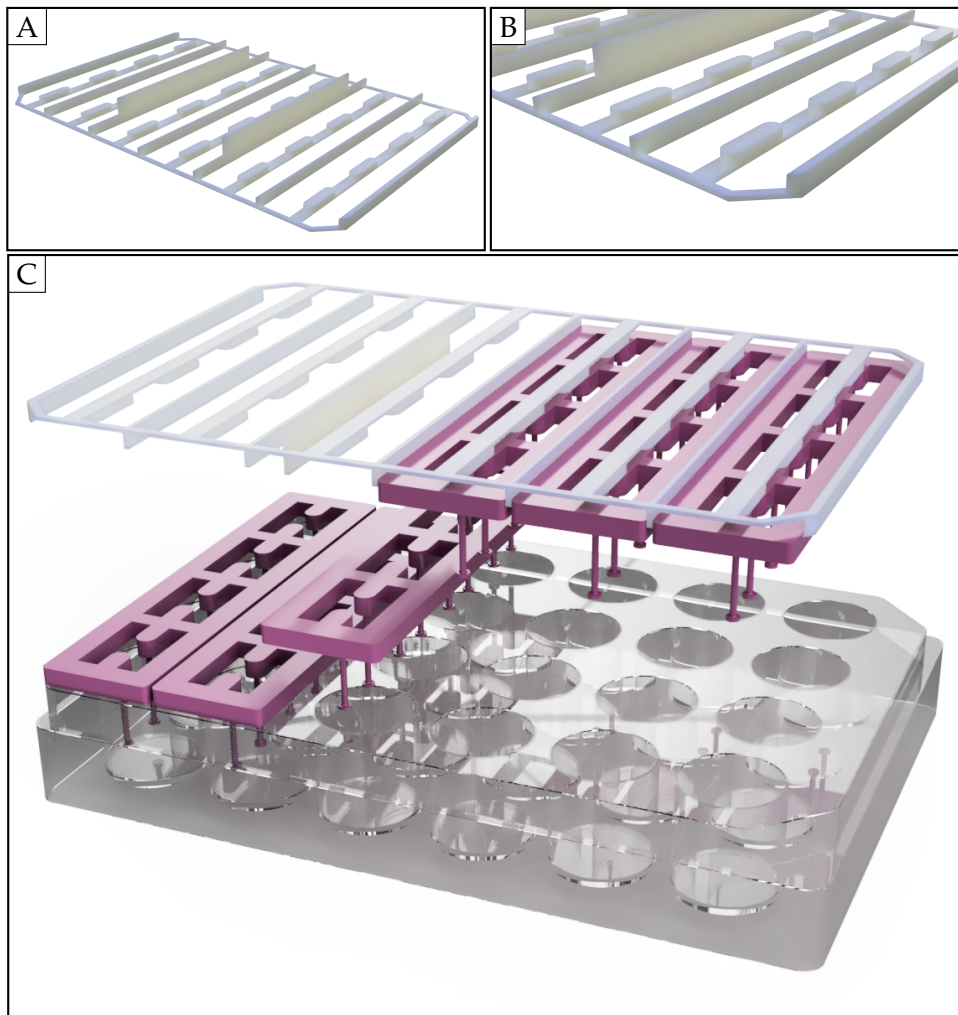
A) Internal grid geometry; B) Part of inner grid to deform racks.
